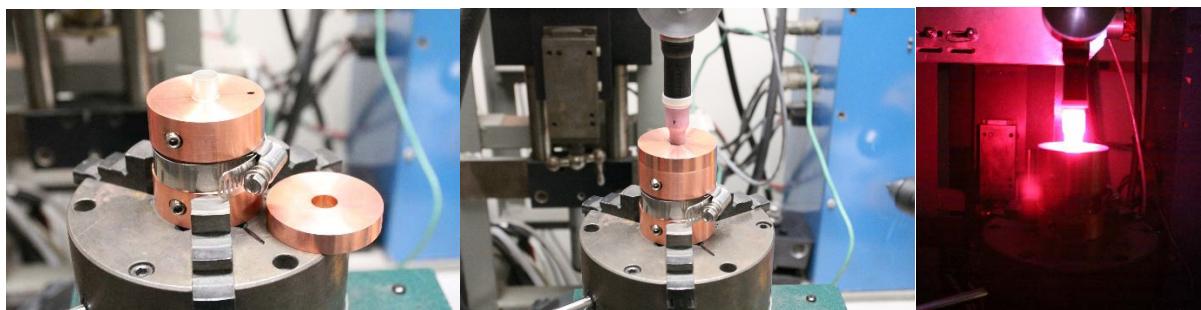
Welding fixture for tube-to-hat GTA weld showing a) chamber, b) assembly, and c) arc light during weld.
